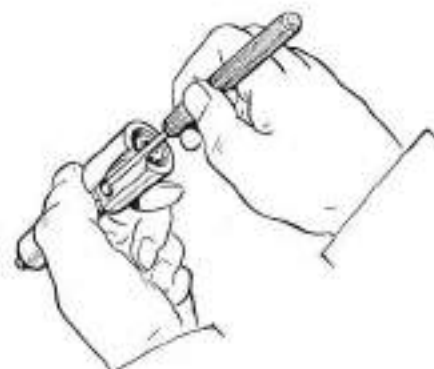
Insert special groove scraper until hooked nose of scraper enters fuel gallery. Press scraper hard against side of gallery and rotate nozzle to clear any carbon deposit from this area.
